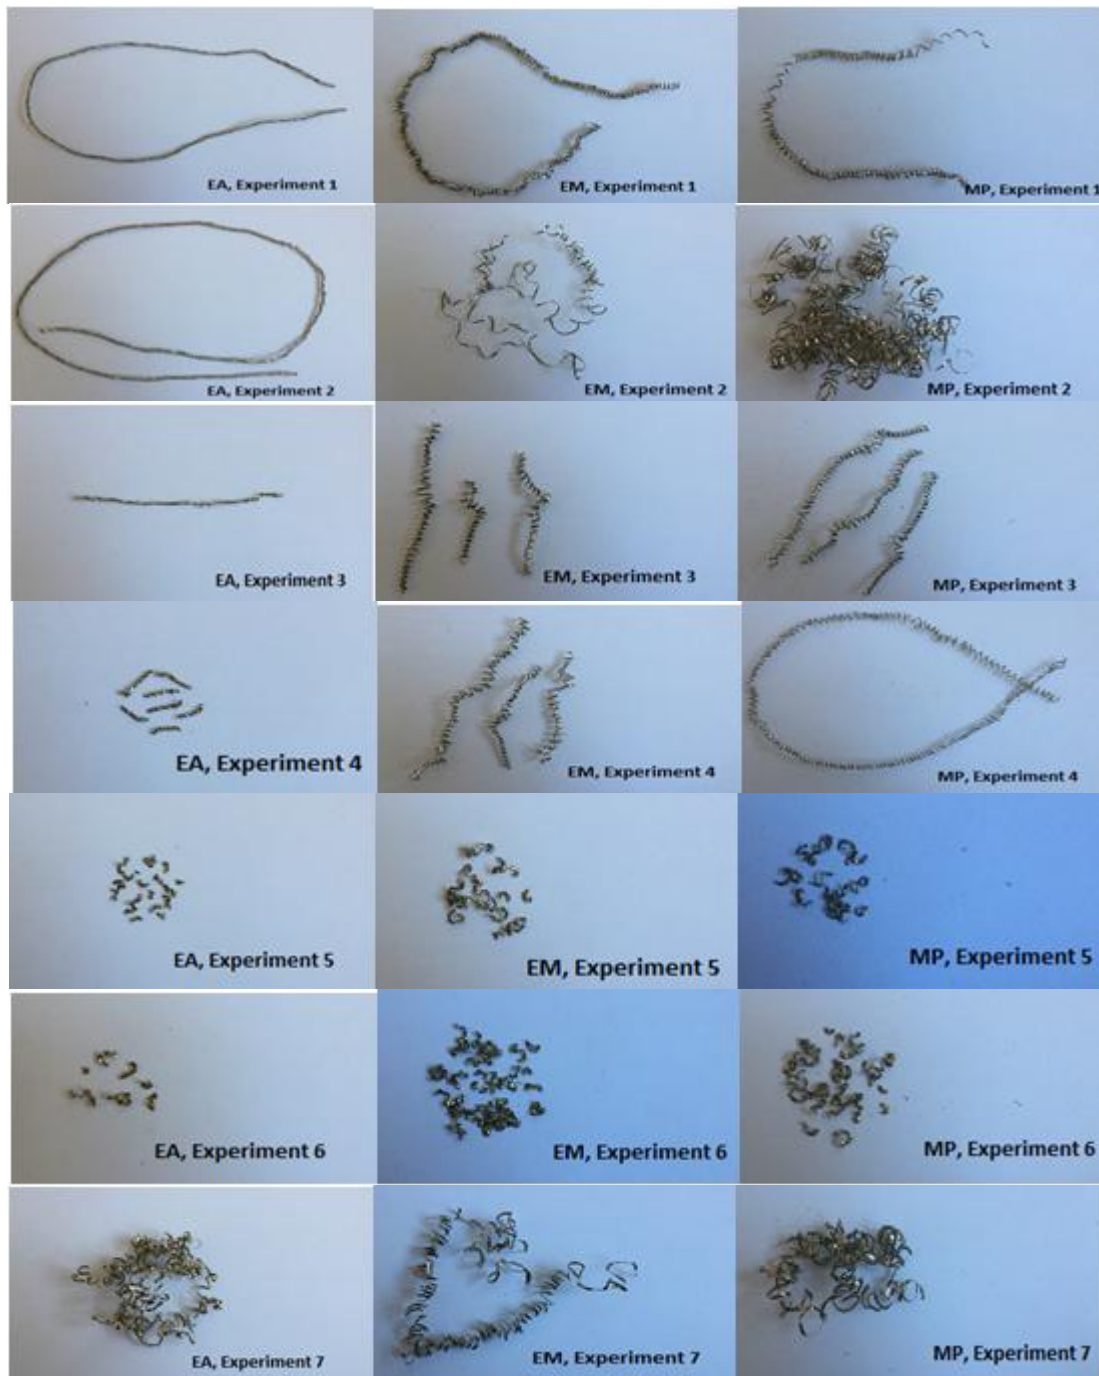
Images of chips formed by cutting tools with different chipbreaker forms when machining
